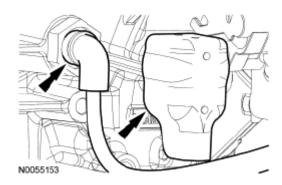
Locating Heat Shield Courtesy of FORD MOTOR CO.
